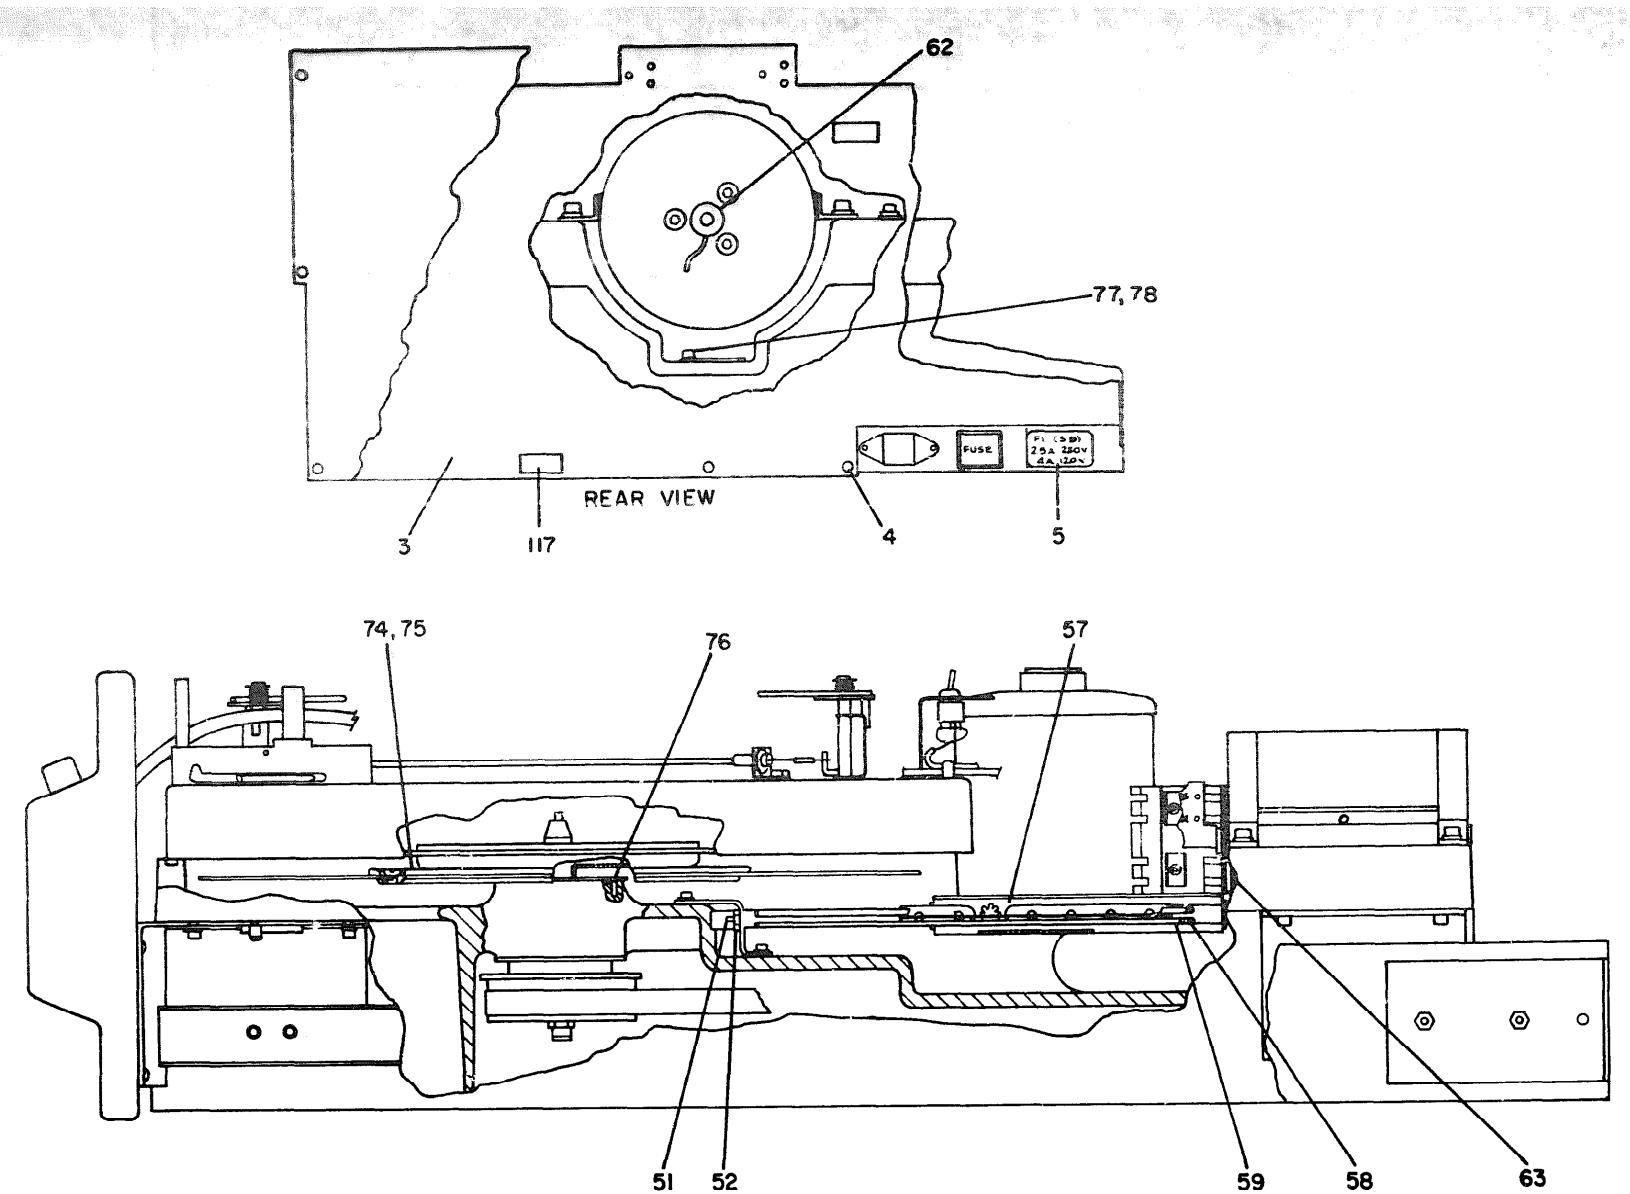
Disc Drive Assembly (Sheet 5 of 5).
